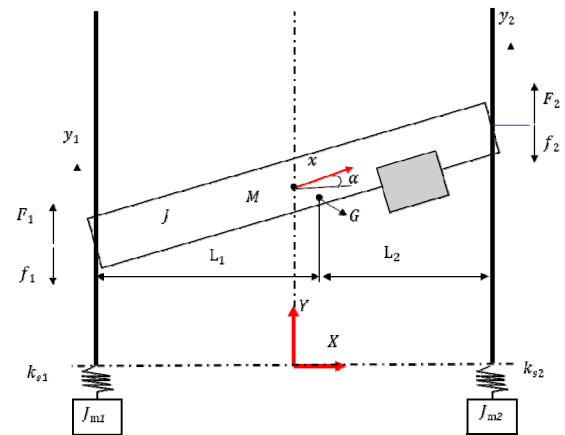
Free body diagram of dual-servo gantry type machine tool
